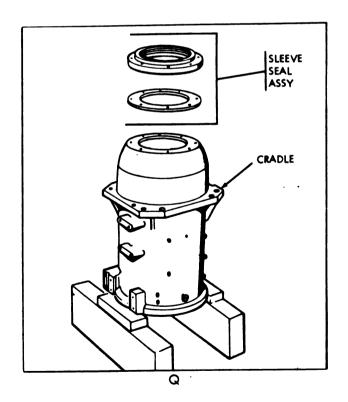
Recoil mechanism disassembly or assembly (4 of 5).
